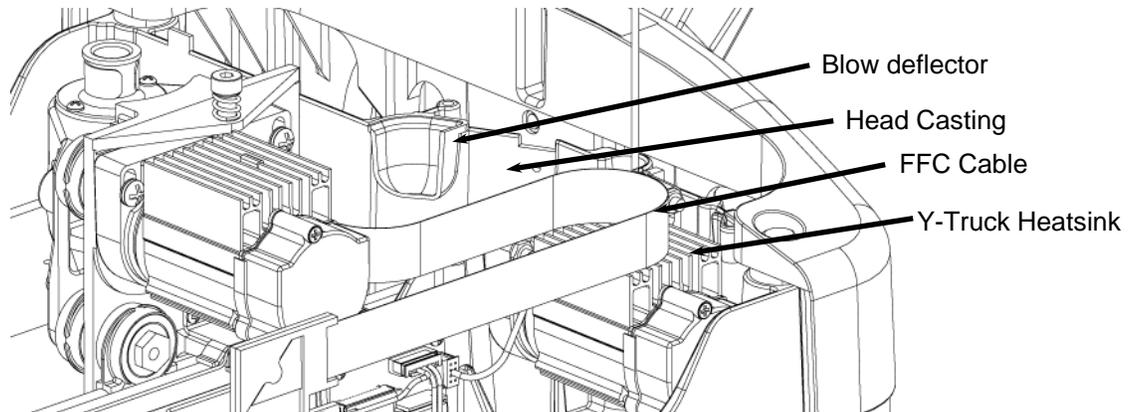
EXPLODED VIEW OF THE REMOVED COVER
